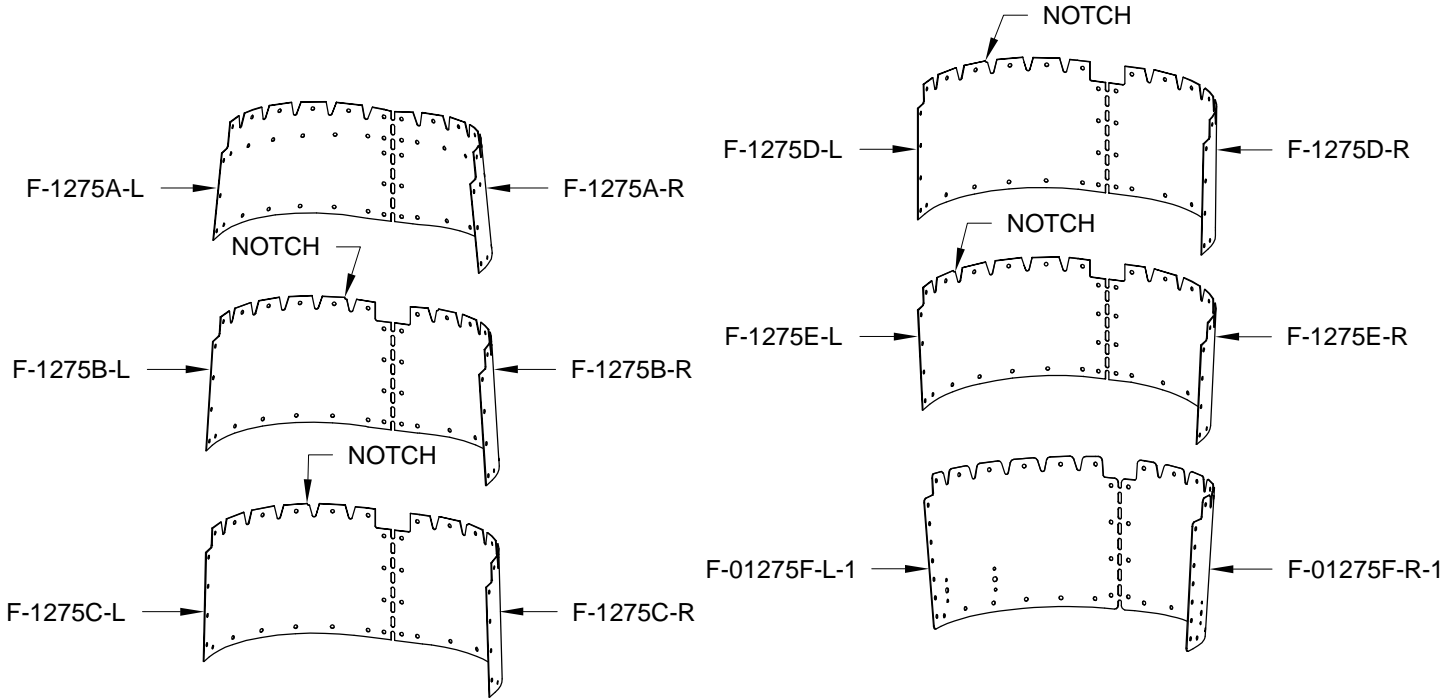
SEPARATING FUSELAGE CORNER SKINS
